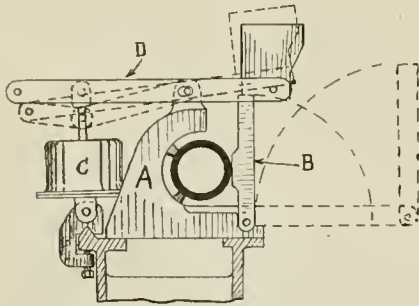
HYDRAULIC CLAMPING FIXTURE FOR SHELLS.
